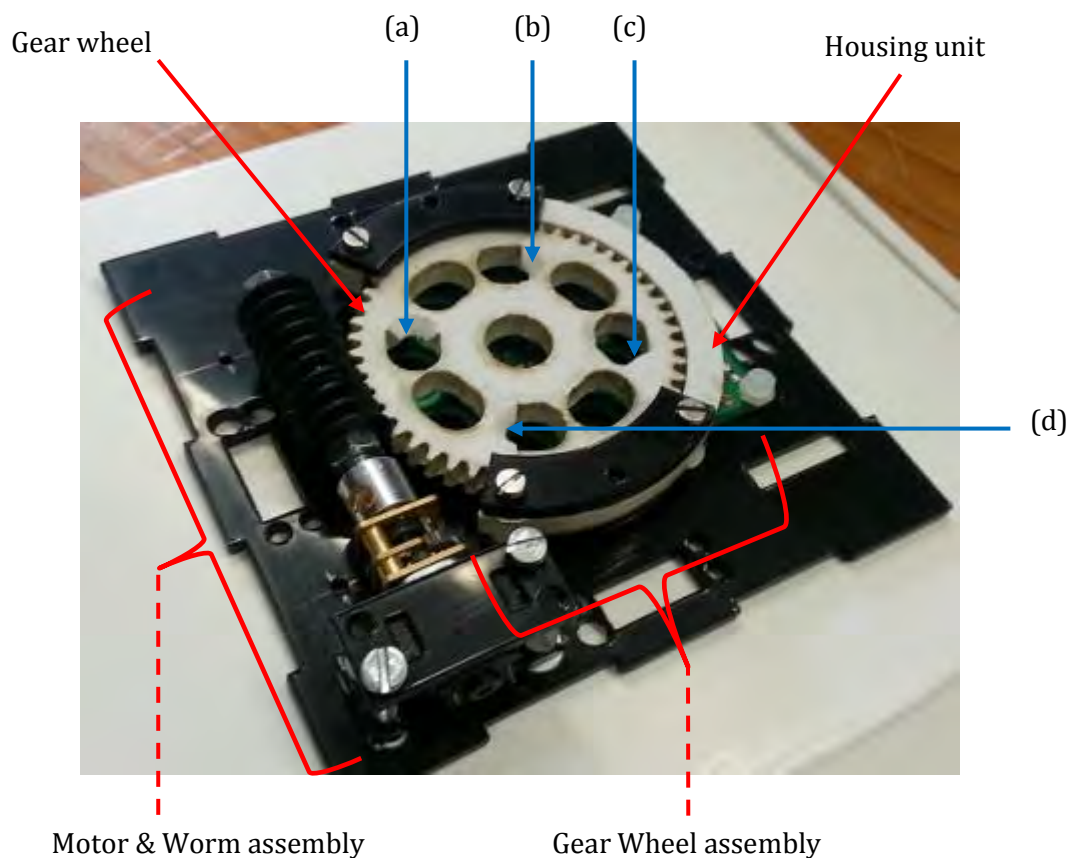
A photograph showing a connector's Motor & Worm assembly, Gear Wheel assembly (gear wheel and housing unit) and the resulting gear wheel structure with filed inlet bolt grooves (a), (b), (c) and (d), unfilled outlet grooves, and a centrally located circular groove.
